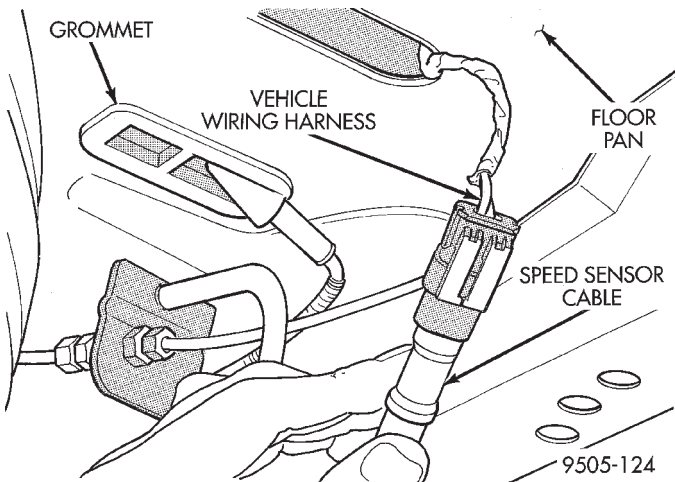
Speed Sensor Cable Connection To Vehicle Wiring Harness
